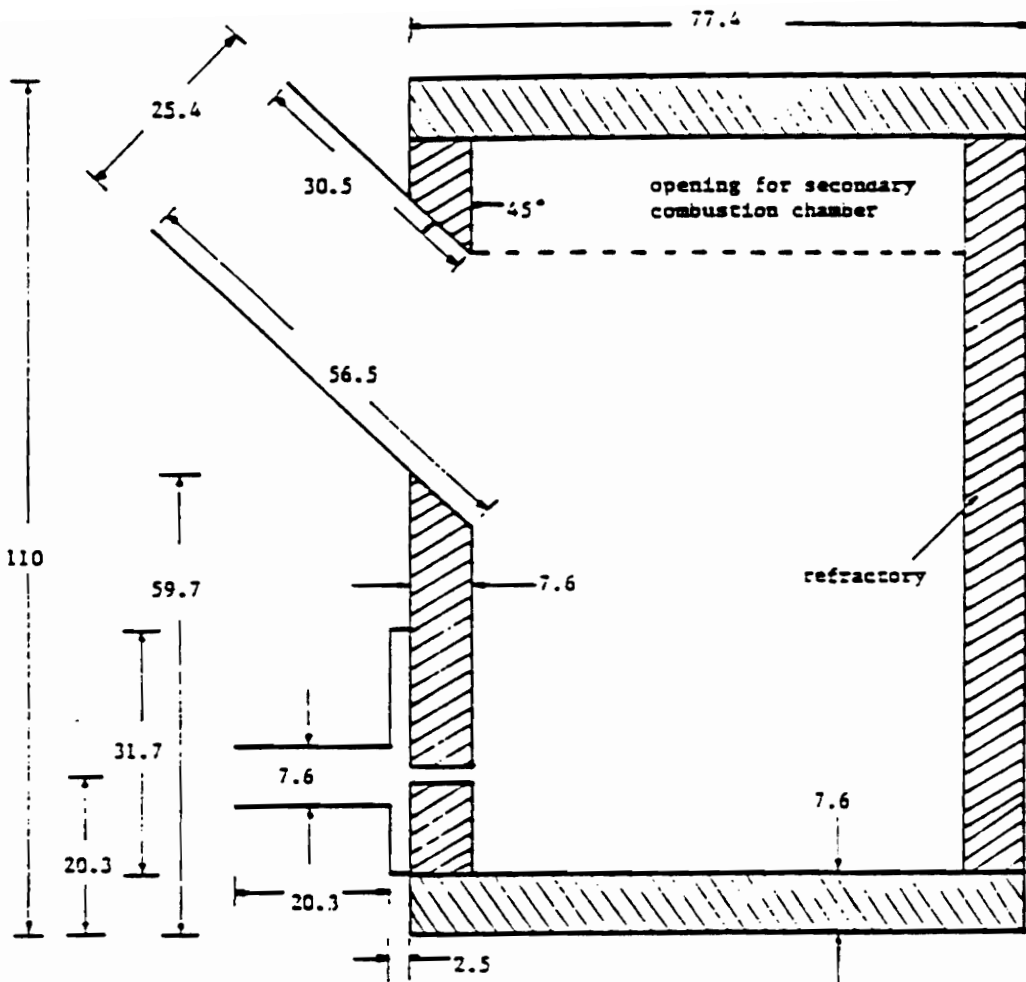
The cross-sectional view of the primary combustion chamber (all dimensions in cm)
